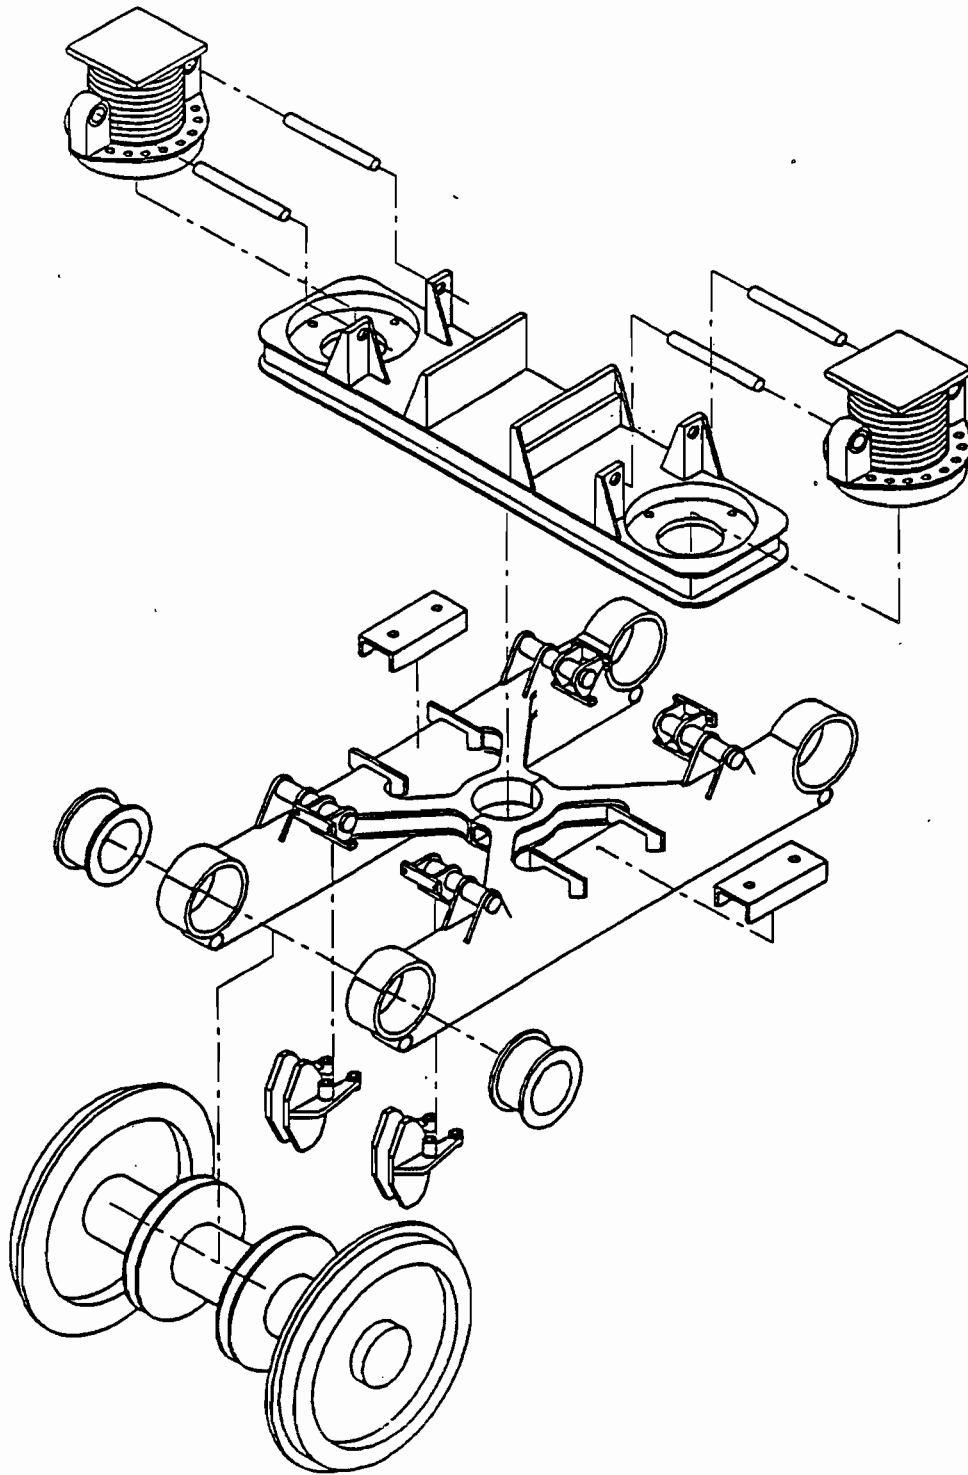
Budd Pioneer III for Amtrak Cars - Exploded View
